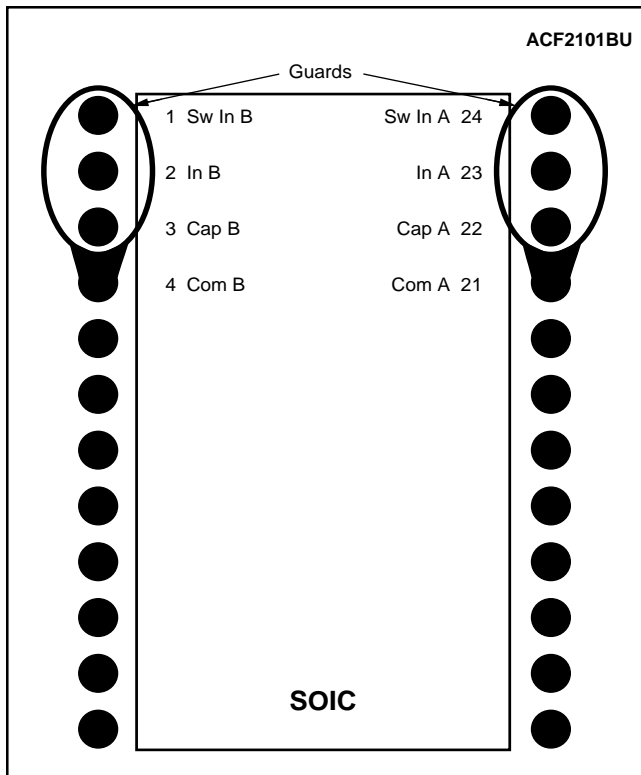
PC Board Layout Showing "Guard" Traces for Input, SOIC package. Both top and bottom of board should be guarded.
